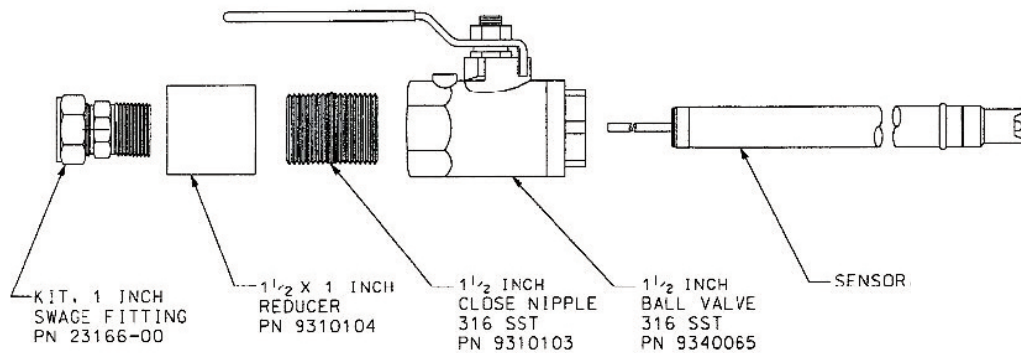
Exploded view of 1½ in. ball valve kit PN 23240-00 used with process connector PN 23166-00 (or PN 23166-01).
